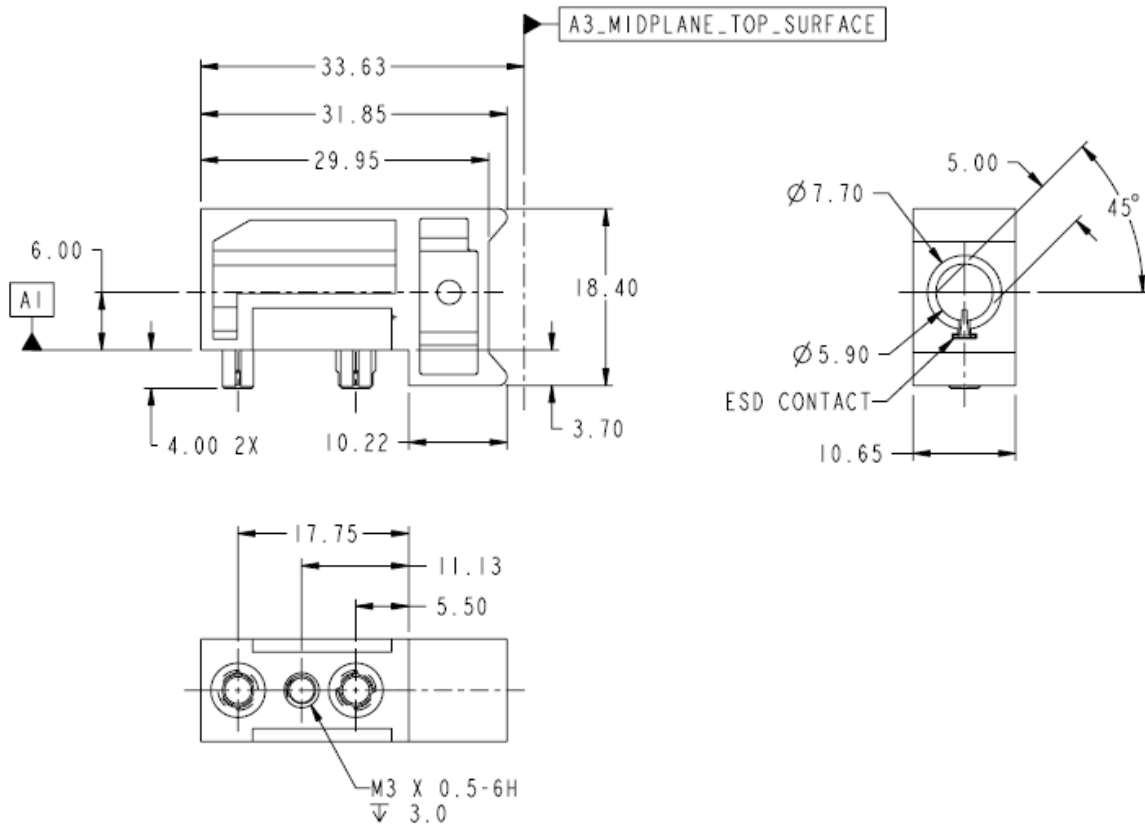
SBBMI Canister Guide Pin Receptacle Dimensions¹
